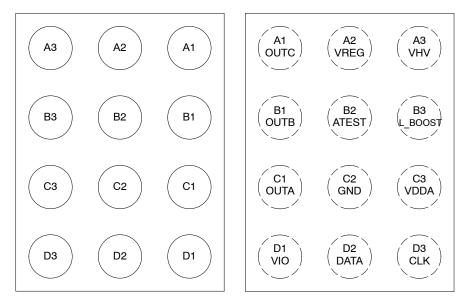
RDL Padout, Bump Side View (left), PCB footprint (right), with RDL Bump Assignment
